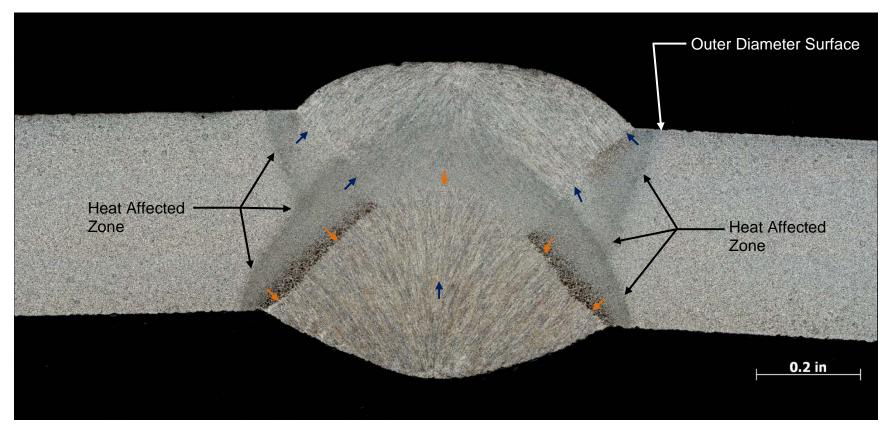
Etched metallographic cross section of the longitudinal seam in the pup 6 taken 6 inch north of girth weld C6. The microstructure of the weld was consistent with a double submerged arc welding process. Blue arrows – weld pool from first pass along outer diameter surface. Orange arrows – weld pool from second pass along inner diameter surface.
